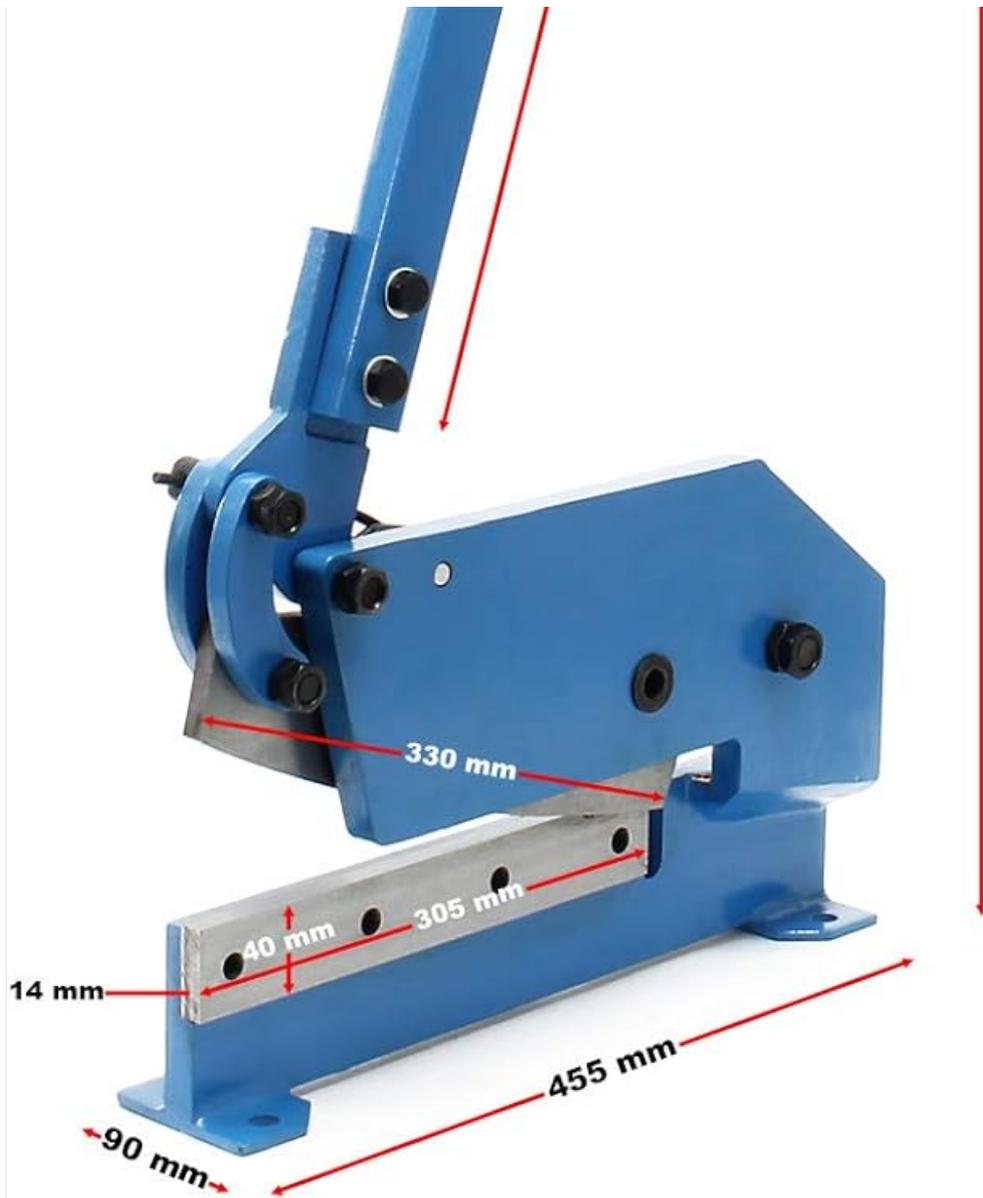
Close-up view of the hardened steel cutting blades, showing their sharp edges and robust construction.
